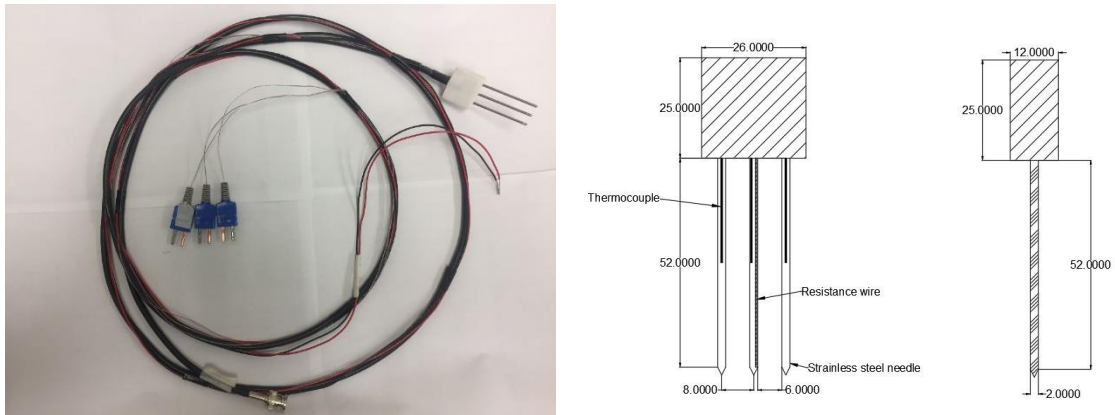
Complete assembly and schematic drawing of the T-TDR sensors.
